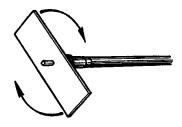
Cardboard pointer on inner flex for checking the number of turns.
